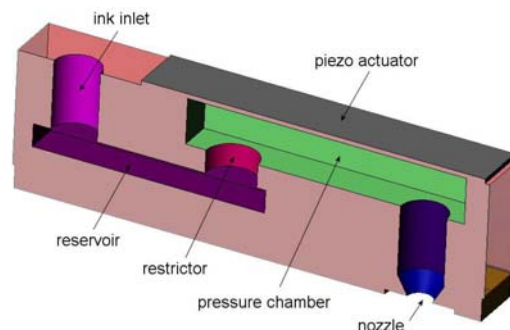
Cross sectional view of a typical piezo DOD inkjet print head.
